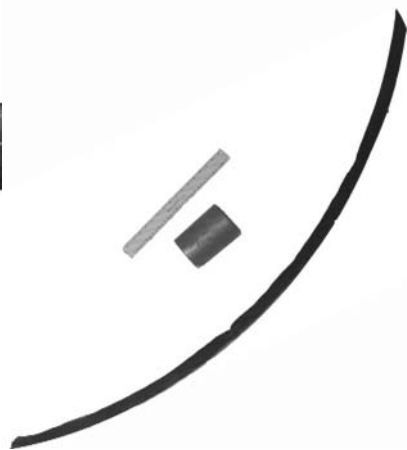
Part of the bearing broken away during the accident, with a roller and a 300 mm ruler to indicate scale
